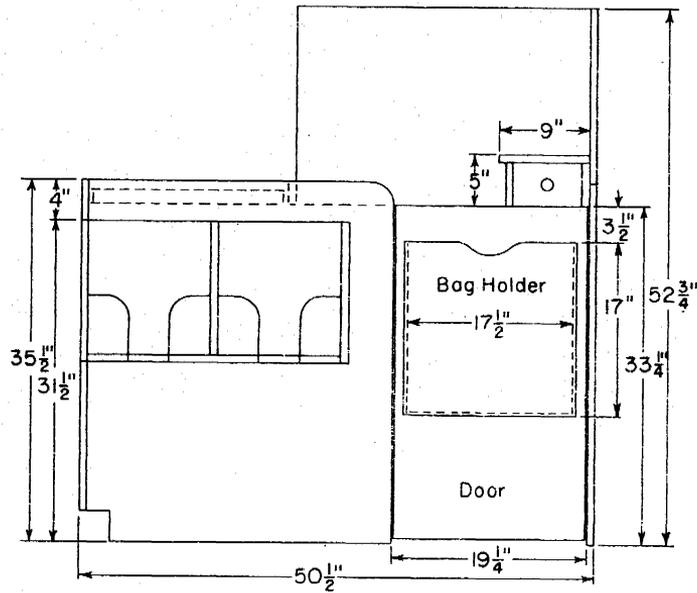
Side view of Redi-chek conveyor check-out counter.
